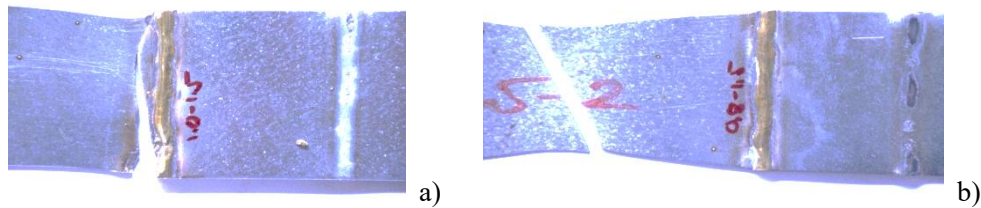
Failure modes of the lap joint specimens: a) fracture in the heat affected zone; b) base material fracture
